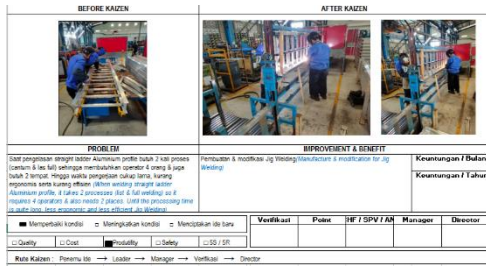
Welding Jig Making Figure 6. Merging holes and logo
